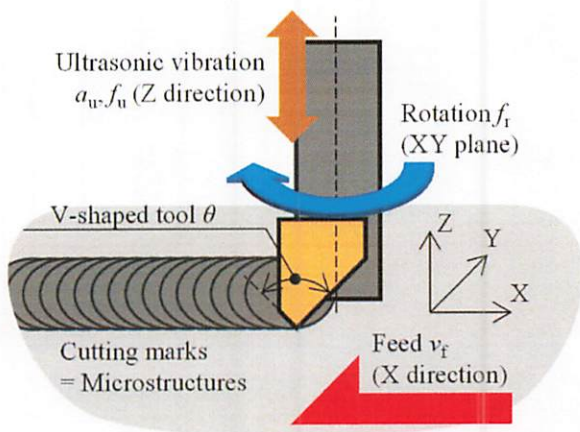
Schematic of ultrasonic-assisted face milling (symbols refer to Nomenclature).
